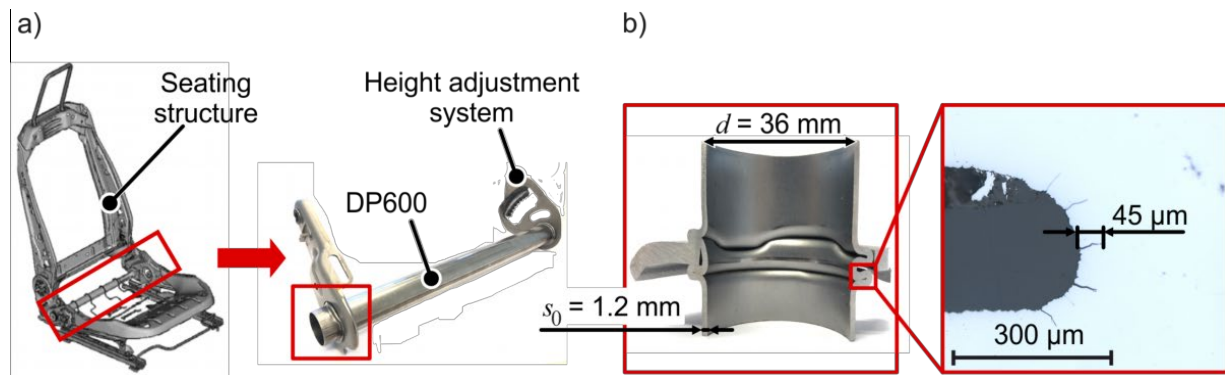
a) Height adjustment system and b) The resulting initial cracks due to forming.
